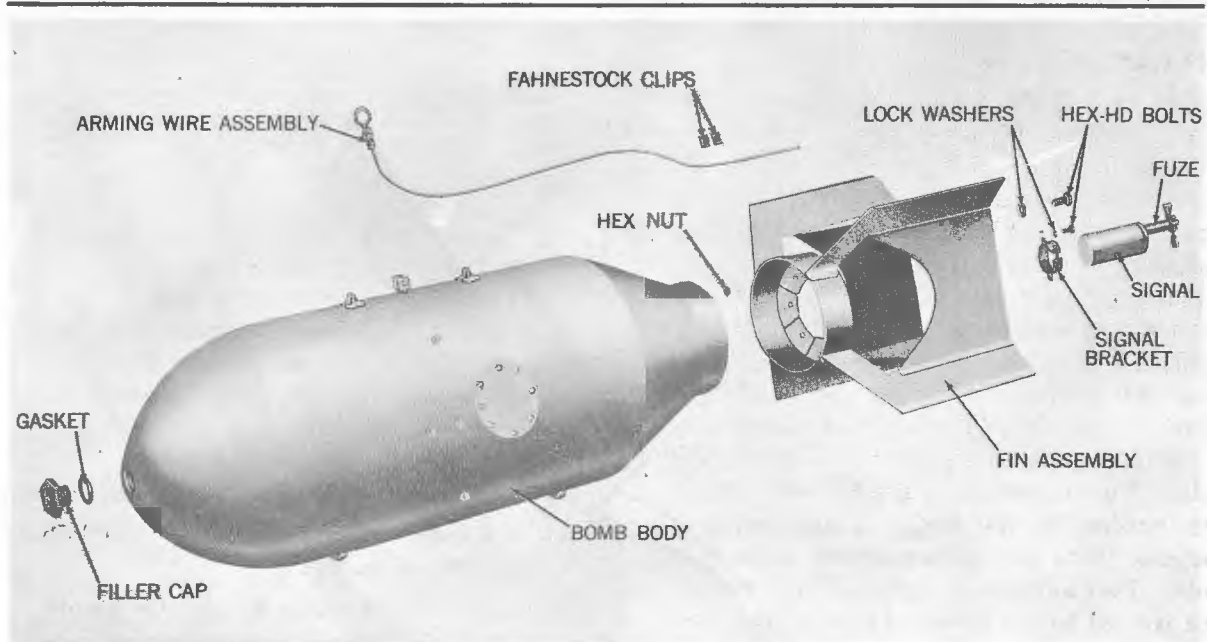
2000-lb Practice Bomb Mk 67 Mod 0, Exploded View.
